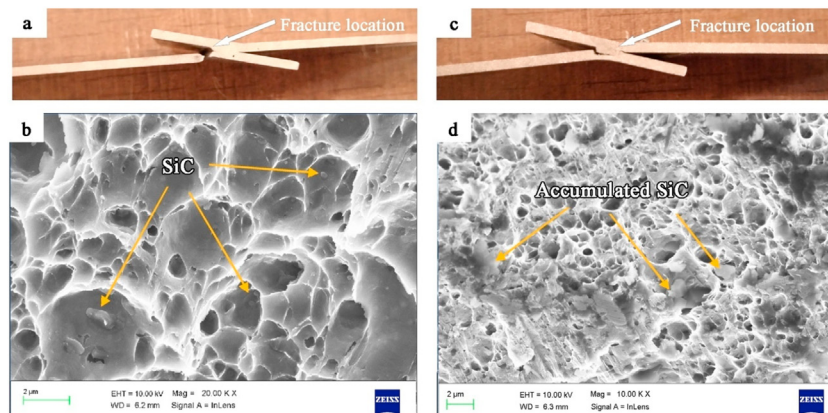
Fracture sample after tensile test and FESEM of fracture surface of sample (a–b) 20–1500 (c–d) 26–1500.
